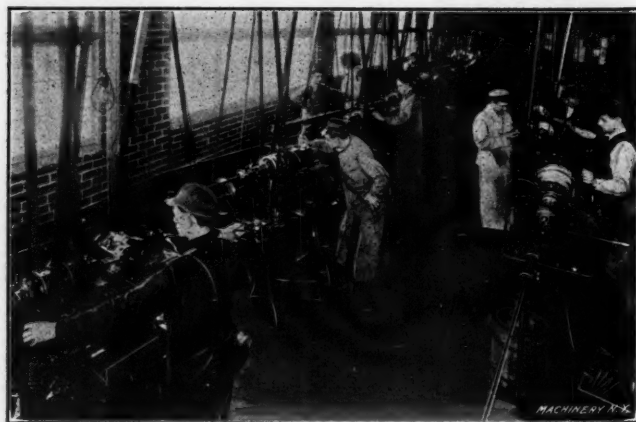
Battery of Automatic Screw Machines—Each Piece is Inspected at the Machine before the Next Operation
